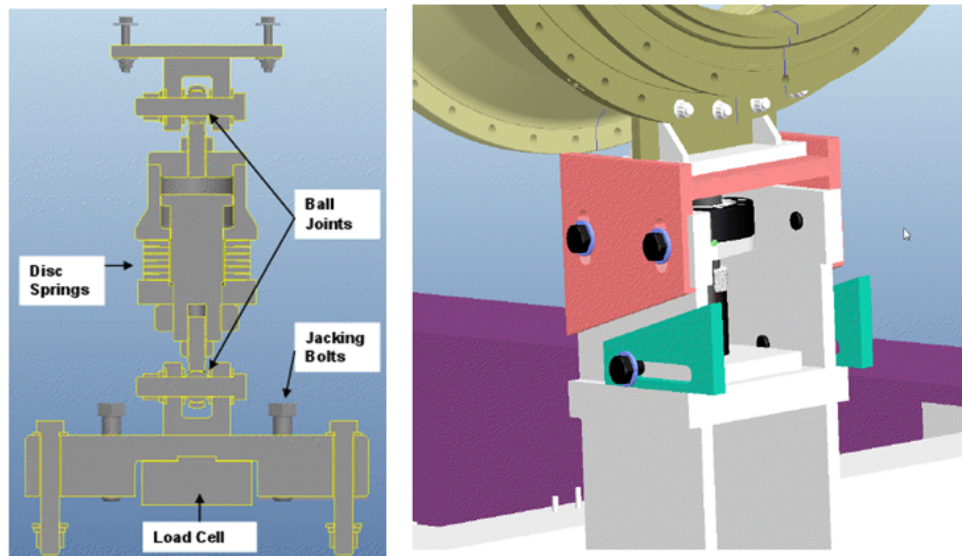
Left, Solar Turbines concept drawing for a Taurus 65 engine mount. Right, Solar Turbines proposed aft-mount for the Titan 130. This concept design does not have a provision for axial or radial expansion and is rigid. A hydraulic jack and load cell is used to set the alignment of the engine.
